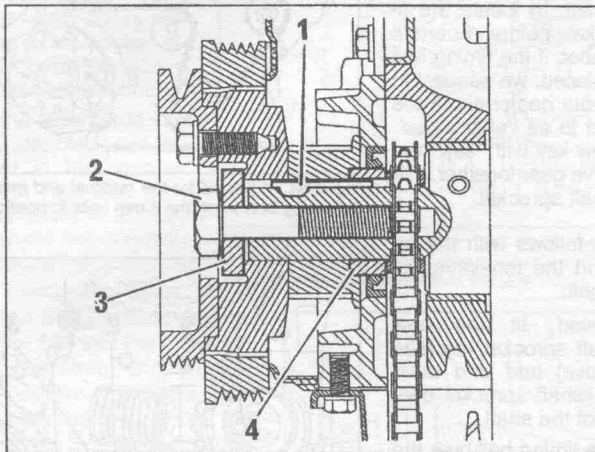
Sectional view of the crankshaft front end with the special key.
